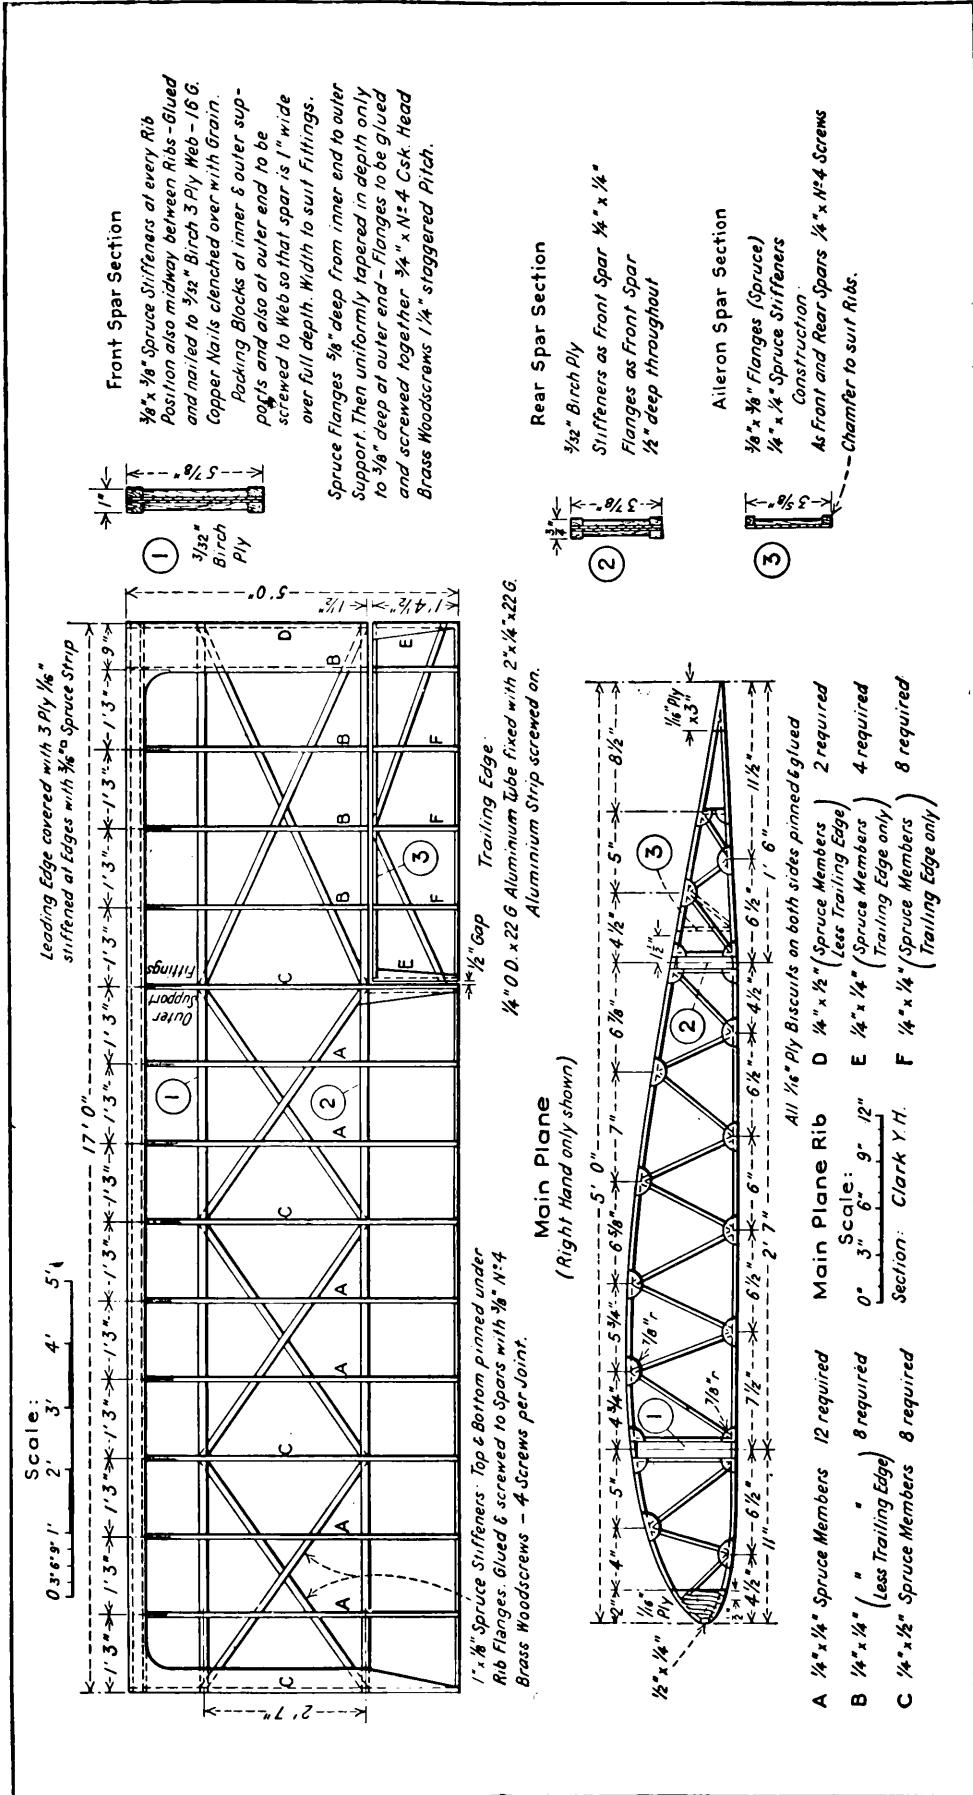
Detailed Drawings Showing Right-hand Main Plane Assembly of the Dickson Training Glider, the Sections of the Wing Spars and the Construction and Airfoil Section of the Clark Y. H. Wing Rib.
